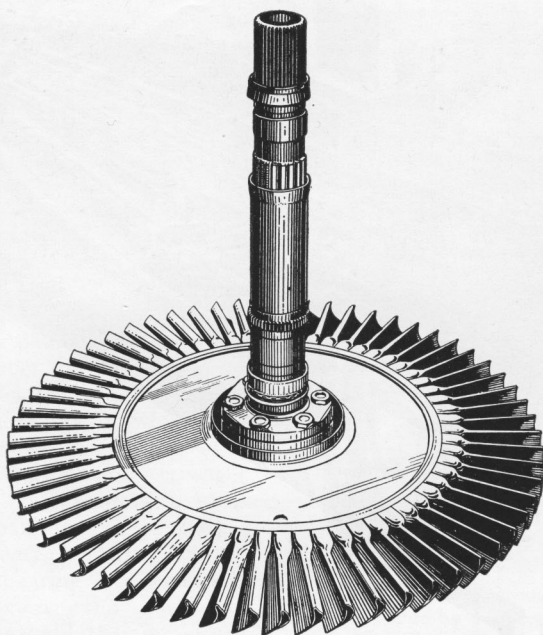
Hollow blade turbine assembly of the 004. Cooling air is forced inside the flange near the hub and up behind a sheet spot-welded to the disk, then through the blade roots, and out through the tips. Gear teeth cut on the shaft just ahead of the rear bearing mounting point drive the oil return pumps. The turbine shaft is attached to the compressor shaft by a splined coupling.
